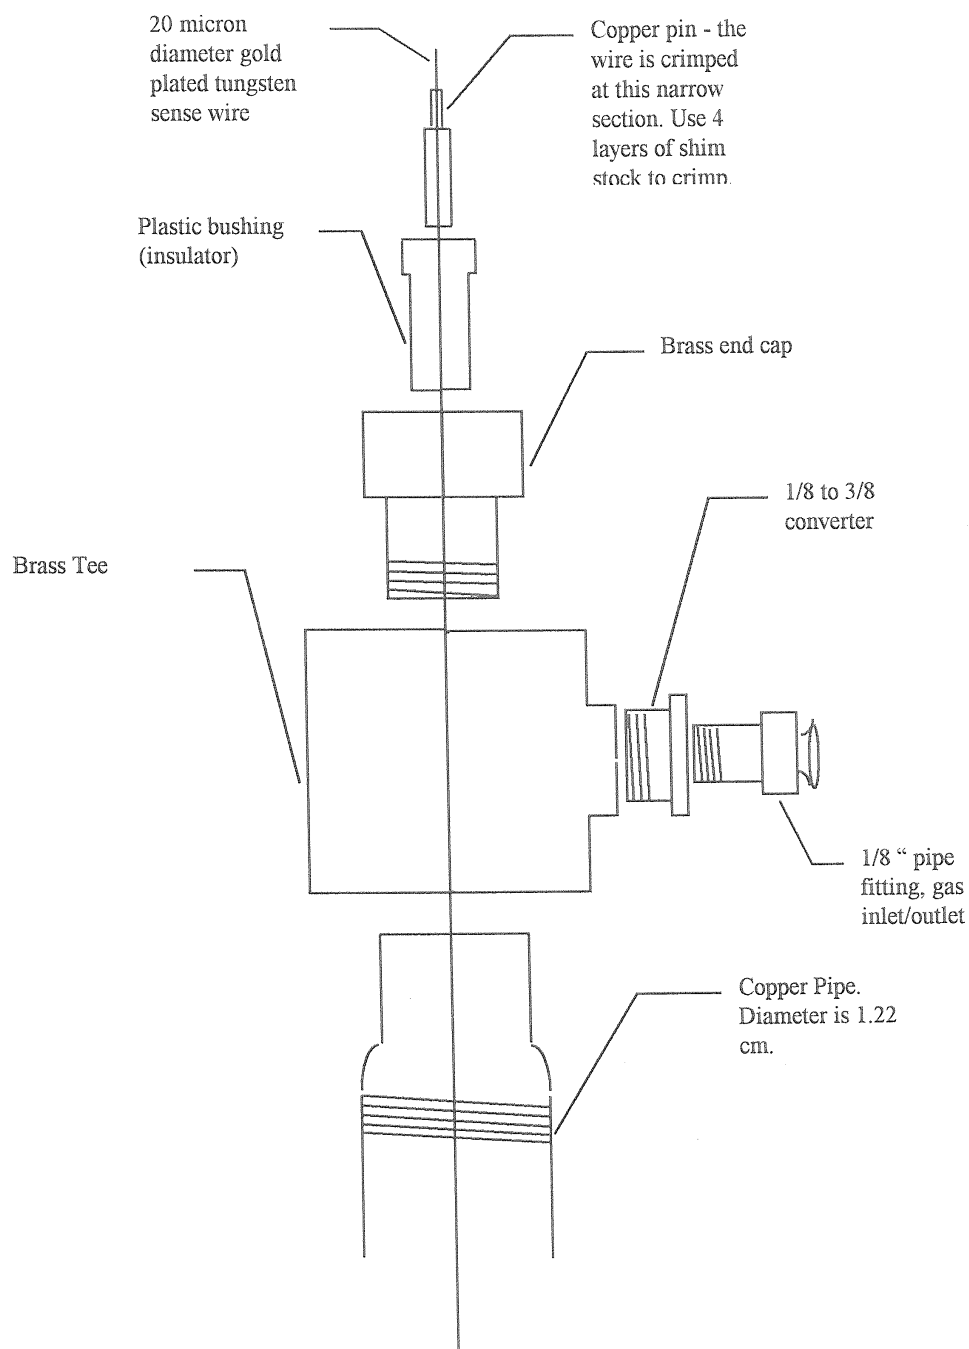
Exploded View of One End of a Single Wire Proportional Chamber. All three threads that fit into the brass Tee should have a single turn of teflon tape on them. The plastic bushing is held to the brass end cap by super glue. Similarly, the copper pin is held to the plastic bushing by super glue. The wire is crimped at the narrow end of the copper pin. Note: the two ends are identical.
